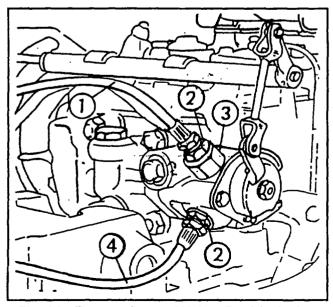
Remote Control Valve, Double Action Cylinder 1. Plug; 2. Metric to SAE Threaded Adaptor; 3. Hose; 4. Adaptor
